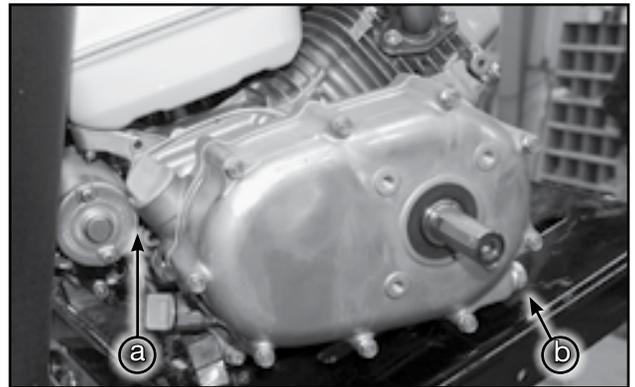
Centrifugal Clutch - Fill Plug (a) and Drain Plug (b)
